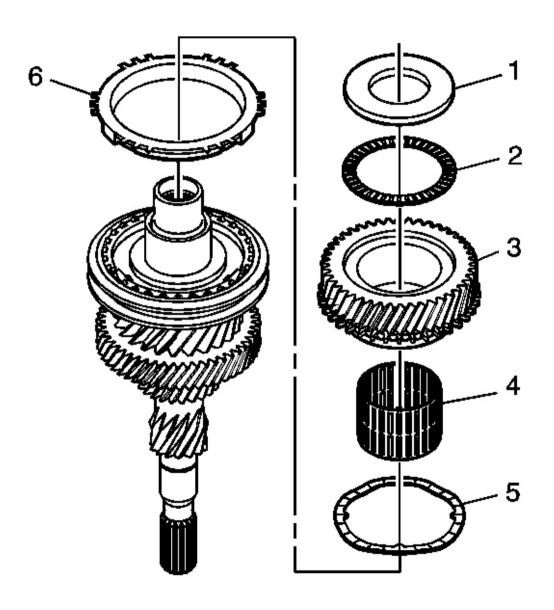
Input Shaft Disassemble & Components Courtesy of GENERAL MOTORS CORP.
